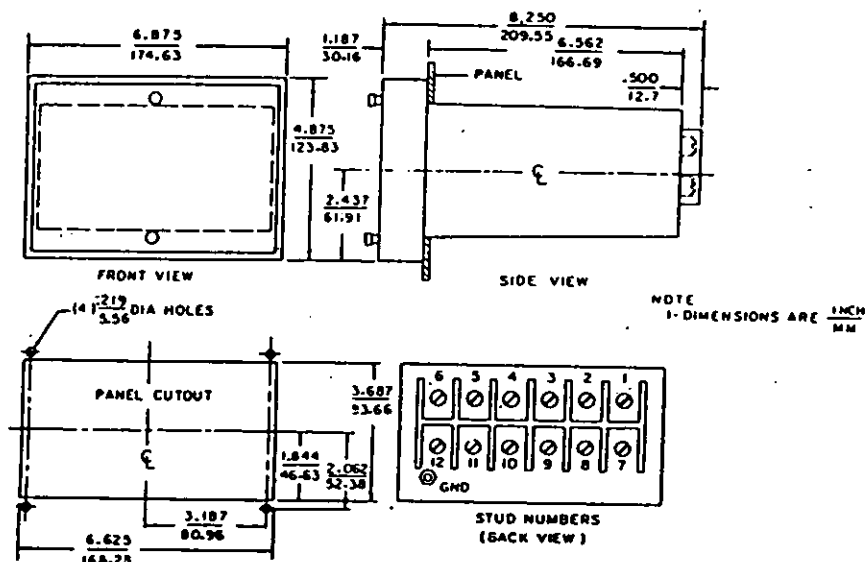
Relay Outline, Panel Drilling, and Front Panel Layout
